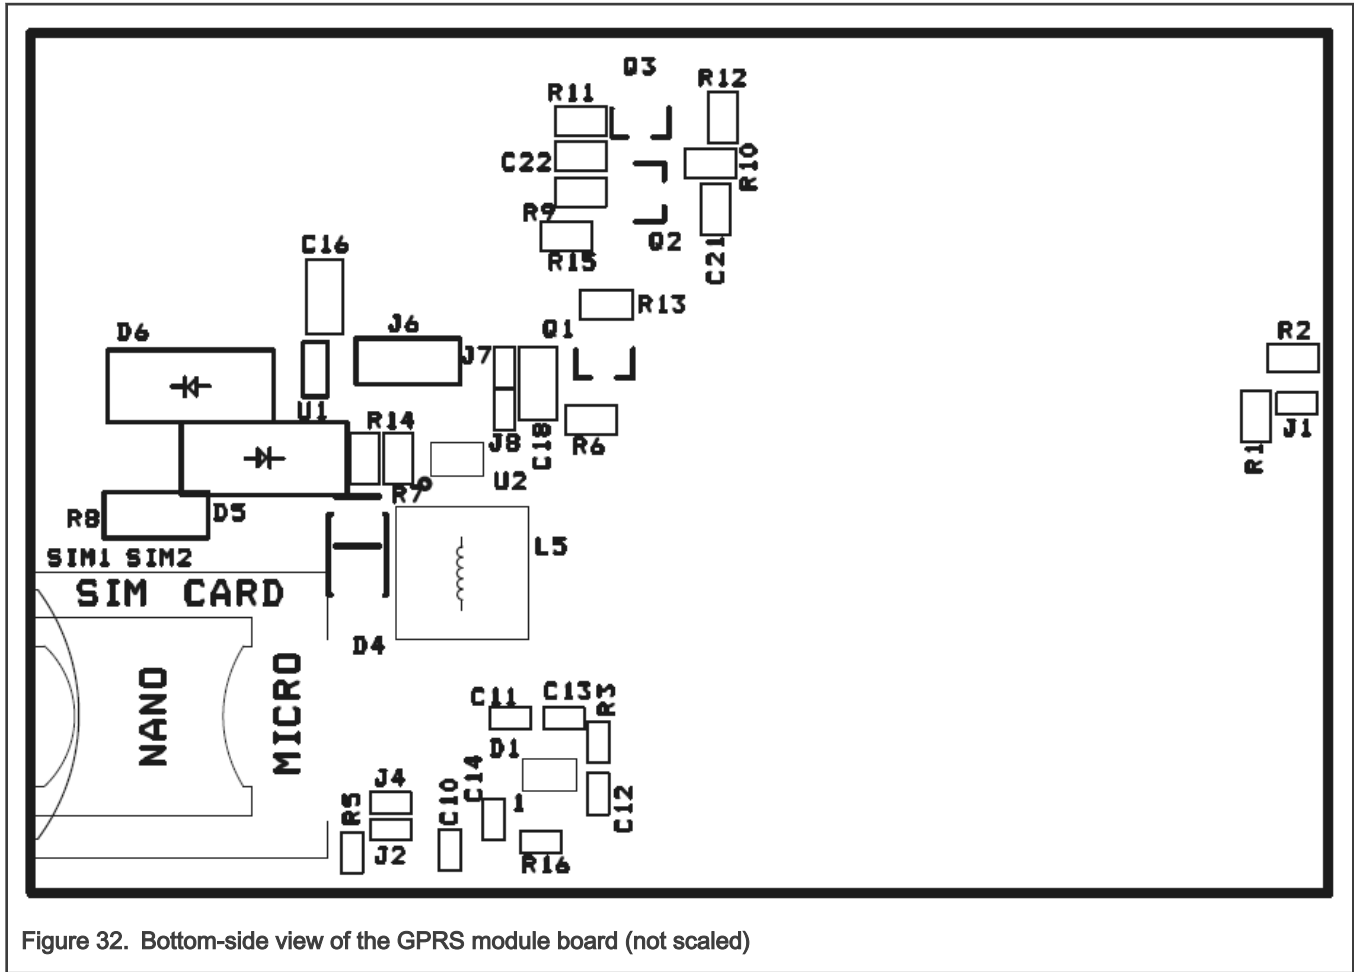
Bottom-side view of the GPRS module board (not scaled)
